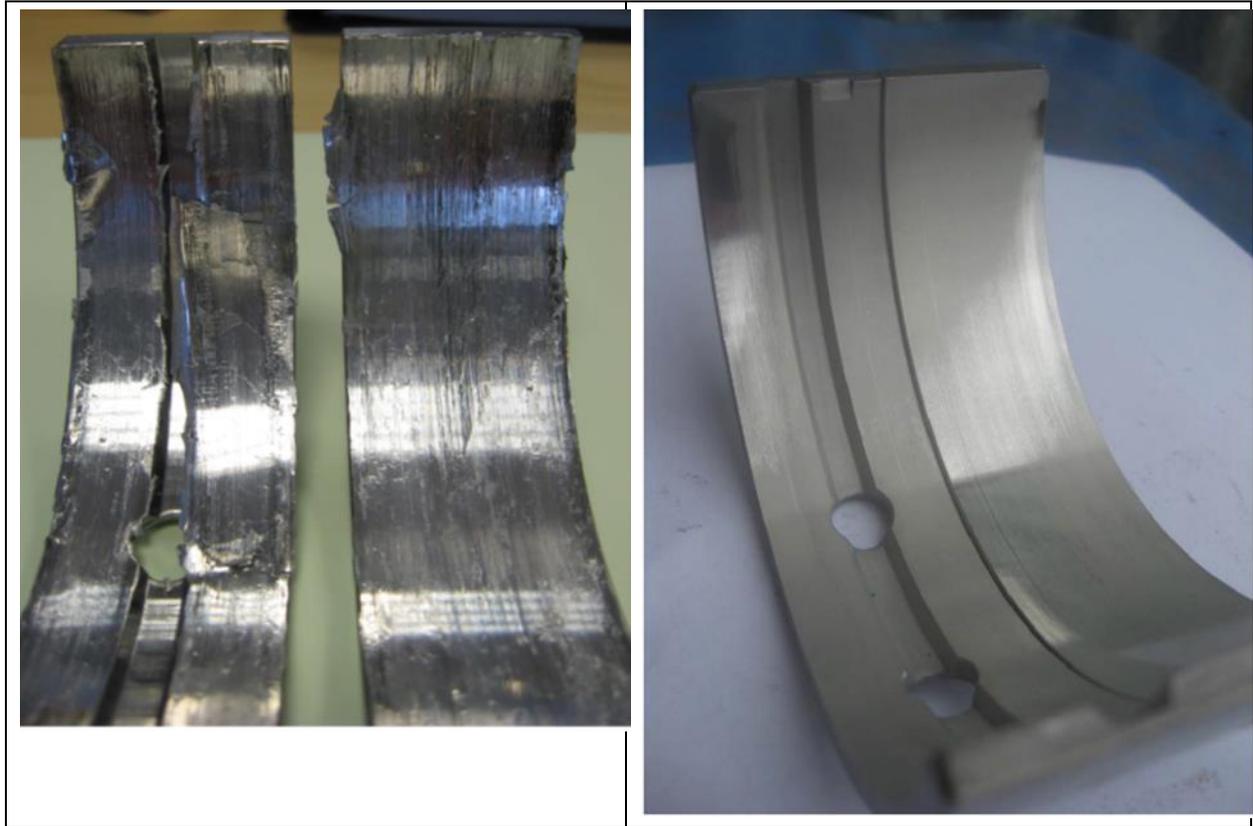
Photographs of steel aluminium bimetal bearing (left image) and leaded bearing (right image) after tests at 13 kgf.
